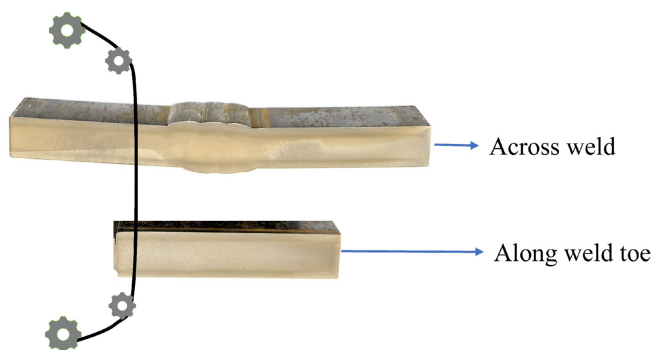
| Specimens showing the cut directions after wire electro-discharge machining. [Colour figure can be viewed at [wileyonlinelibrary.com](https://onlinelibrary.wiley.com)]
